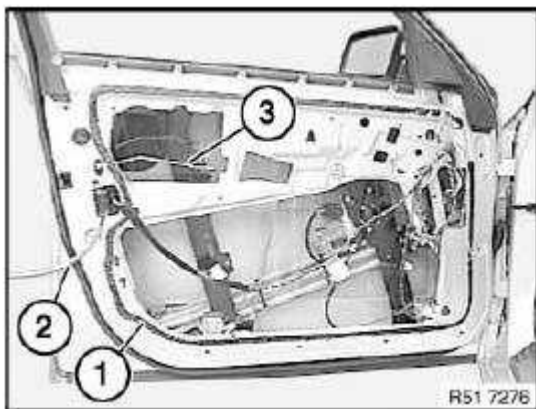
Butylene Tape, Bowden Cable And Lock Knob Control Rod
